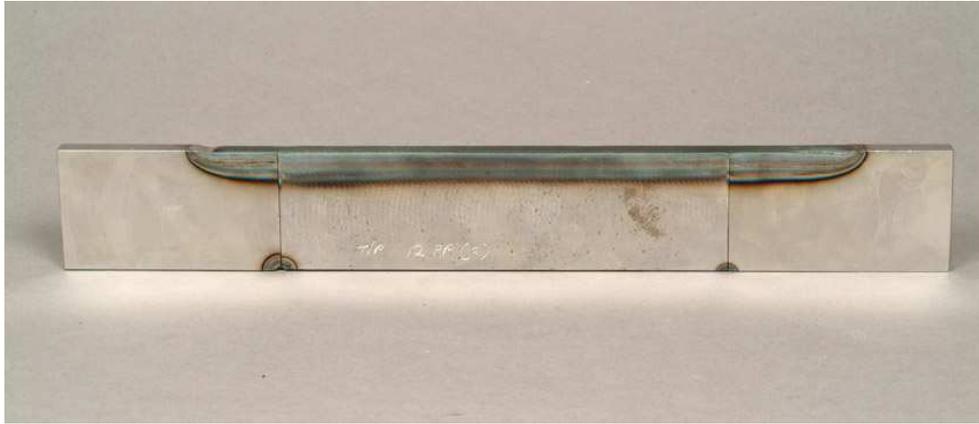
Autogenous welded beam specimen (with run on and off plates tack welded at each end)
